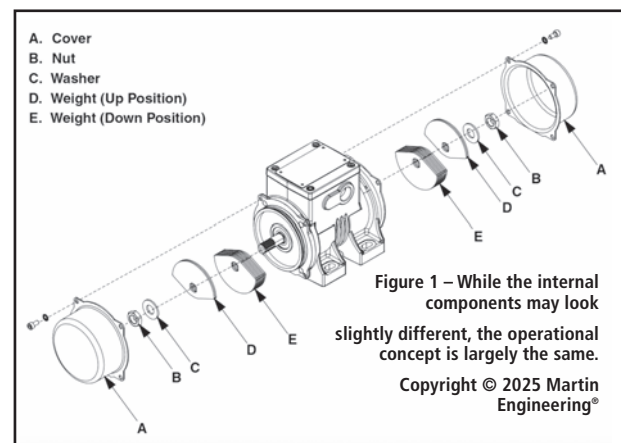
While the internal components may look slightly different, the operational concept is largely the same.
